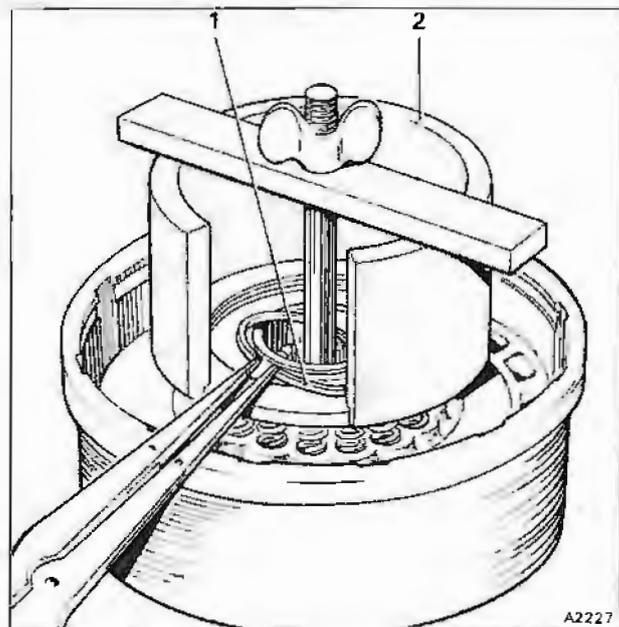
Removing and fitting the direct clutch housing snap ring
